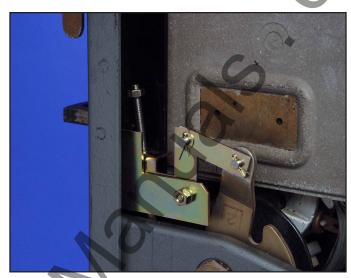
Overview: Reset Assembly and Reset Rod Installed in the Breaker
